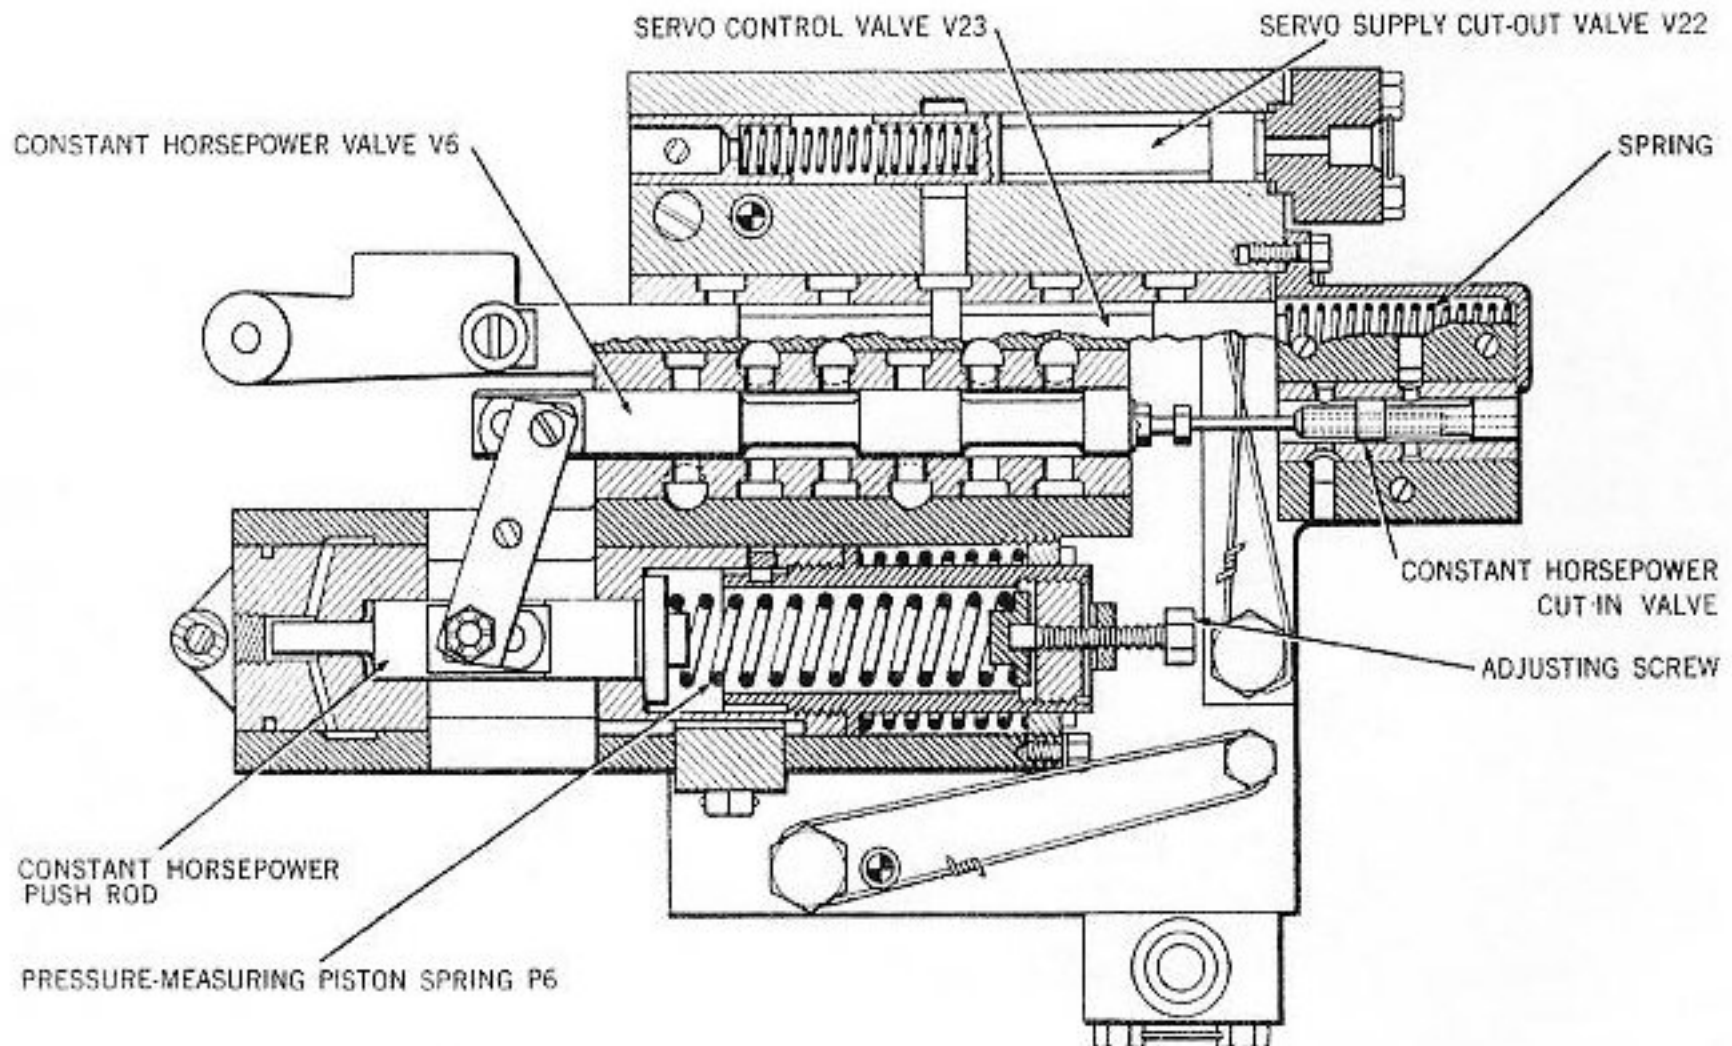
Elevating Gear Constant Horsepower Adjustment, Sectional View
